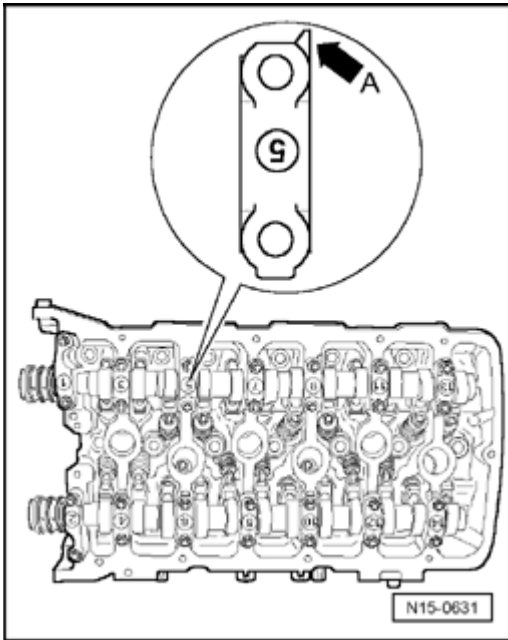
Installation Position Camshaft Bearing Caps, Cylinder Bank 1
